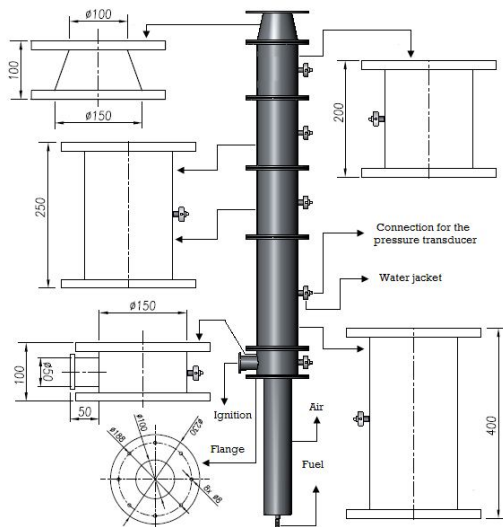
Combustion chamber scheme (dimensions in millimeters).
